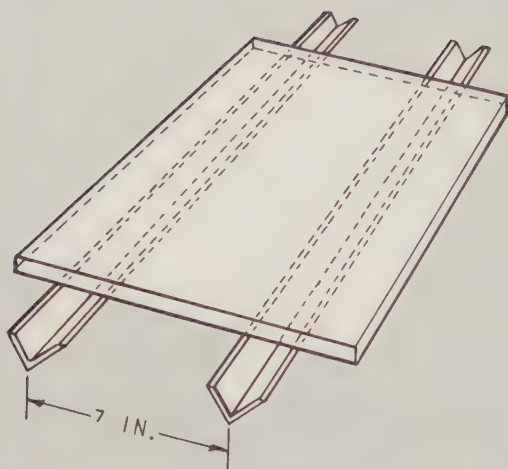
To determine the location of the center of gravity of a passenger car above the ground level, a knife edge test fixture is used consisting of two angle irons welded to a steel plate. The fixture is bolted to the frame of the car.
